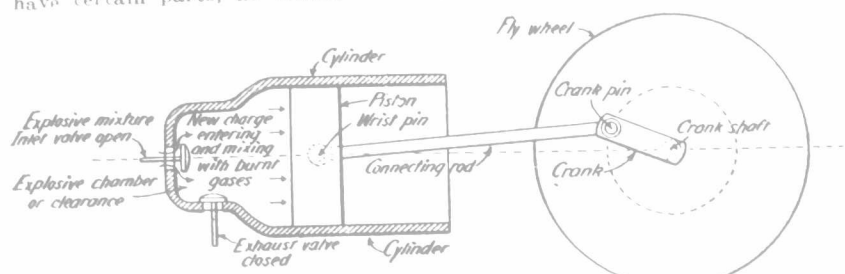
THE FIRST STROKE: SHOWING POSITION OF VALVES WHEN PISTON IS DRAWN BACK ON THE FIRST STROKE AND ENTRANCE OF EXPLOSIVE.
